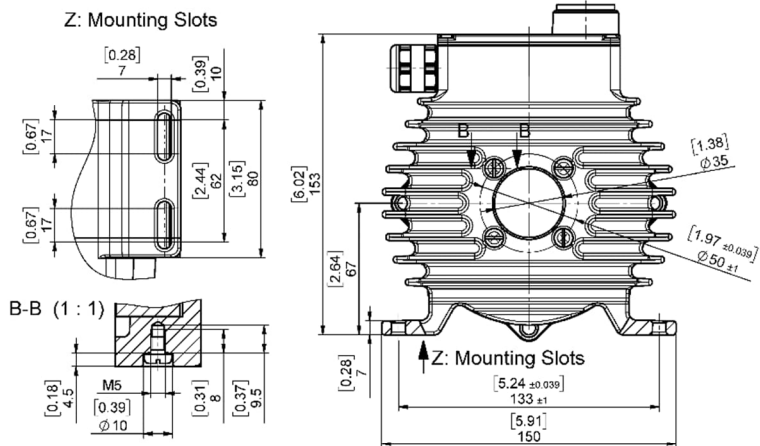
Dimensions of motor with pump heads LPP-600.5 (PP Housing) and LPP-600.13 (PVDF Housing)
